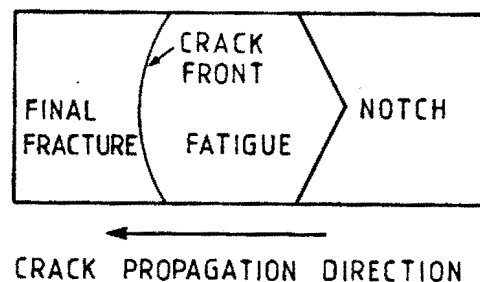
Schematic illustration of the plan view of a typical fracture surface.
